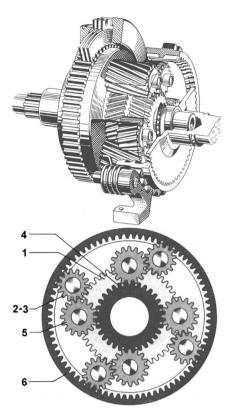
Planetary gear train. 1 - small sun gear; 2 and 3 - broad planet gear; 4 - large sun gear; 5 - narrow planet gear; 6 - ring gear [74].
